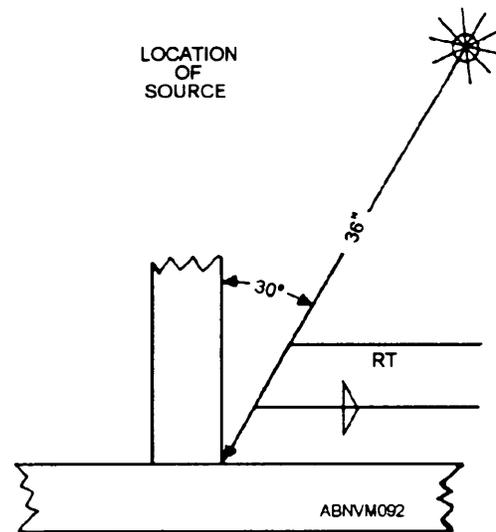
Combining nondestructive testing symbols and welding symbols.
